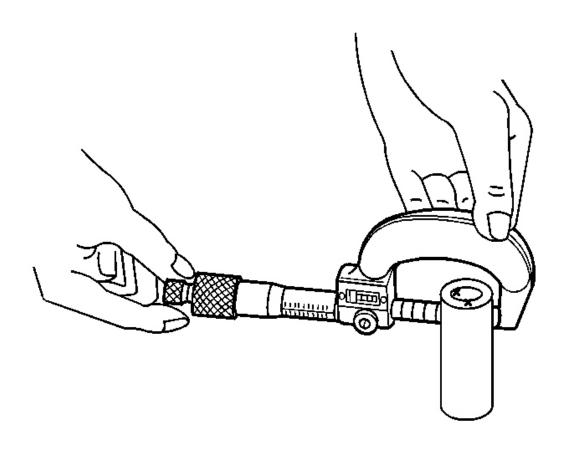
Measuring Piston Pin Diameter Courtesy of GENERAL MOTORS CORP.
